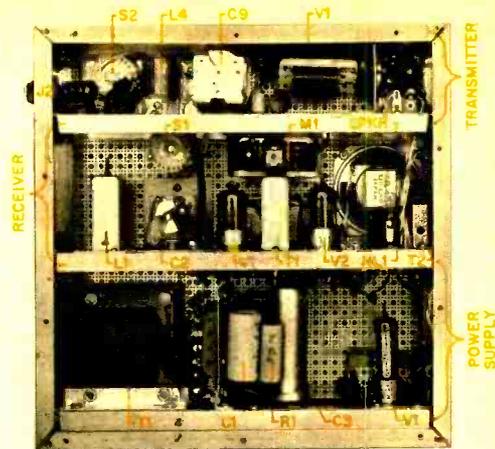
Rear view of Attaché 80. Power supply is lowered in frame first. Receiver is then mounted above it and transmitter is installed at the top.
